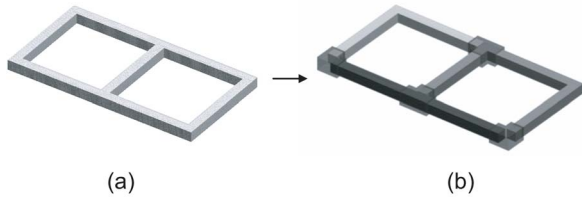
(a) Sample space frame structure and (b) decomposed structure with joints (welded cast sleeves)
